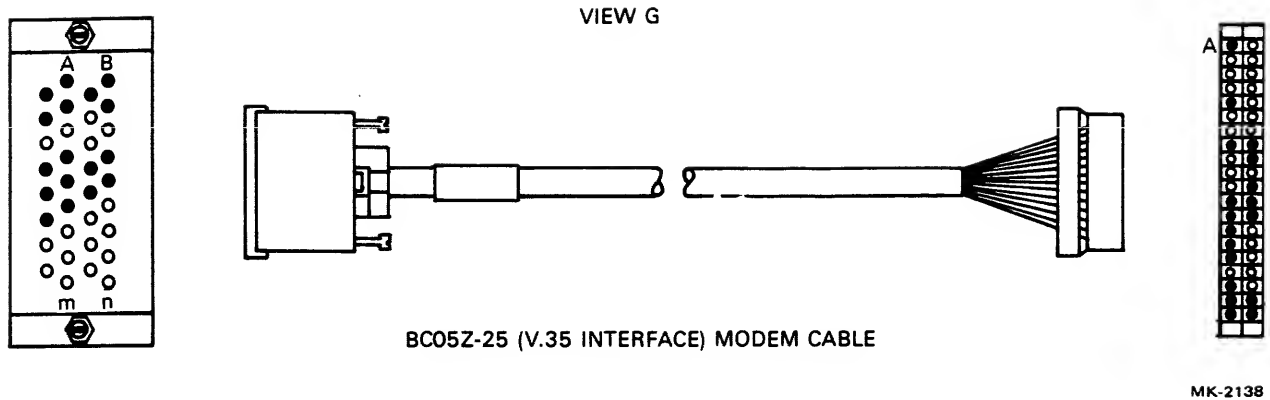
DMR11 Cable Drawings (Sheet 4 of 4)
